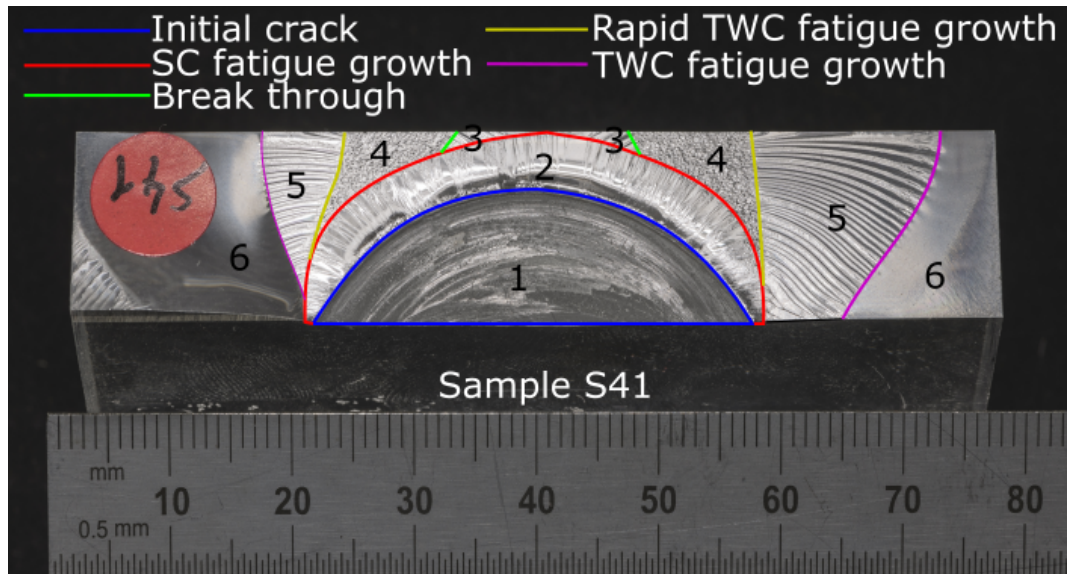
Test on Perspex plate - Fracture surface - Sample S41
